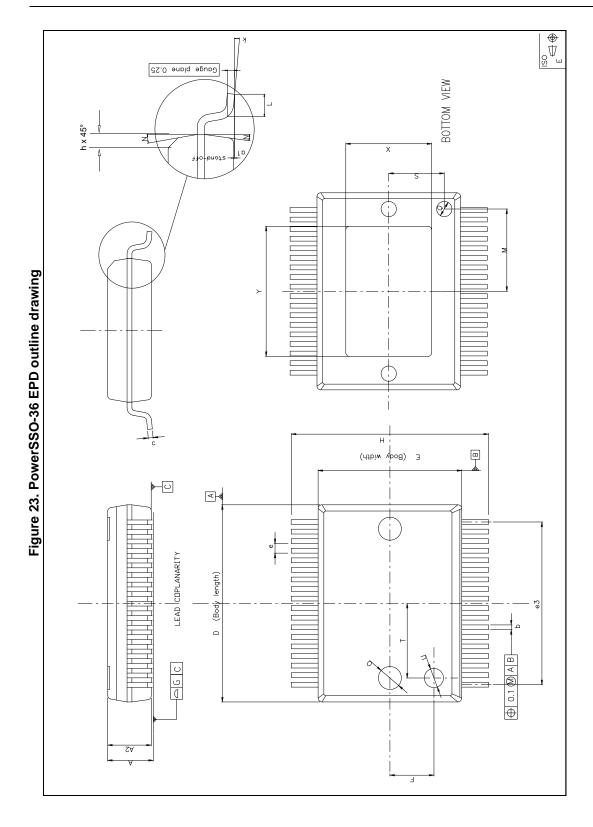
below shows the package outline and Table 74 gives the dimensions.
